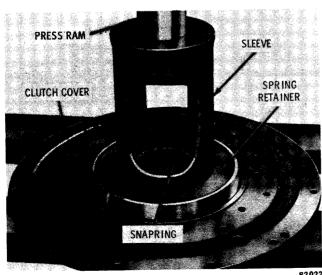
Removing (or installing) spring retainer snapring (VH series)
